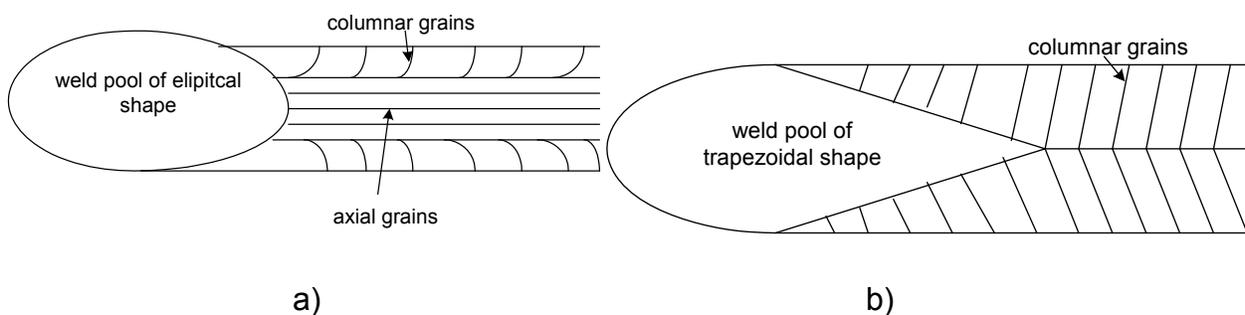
Effect of welding speed on shape of weld pool and grain structure at a) low speed and b) high speed
